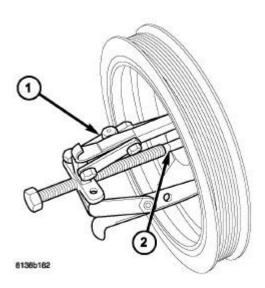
Removing Crankshaft Damper Courtesy of CHRYSLER LLC
